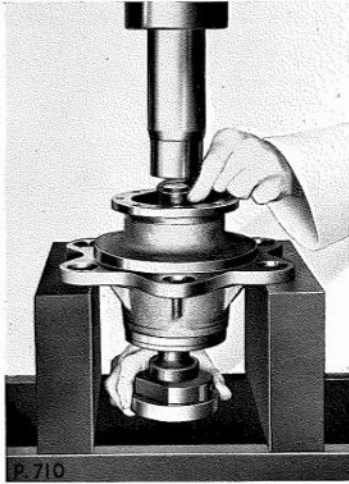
Pressing out the wheel hub inner bearing cup, using the Churchill Tool R.G.322 in conjunction with the universal handle 550
